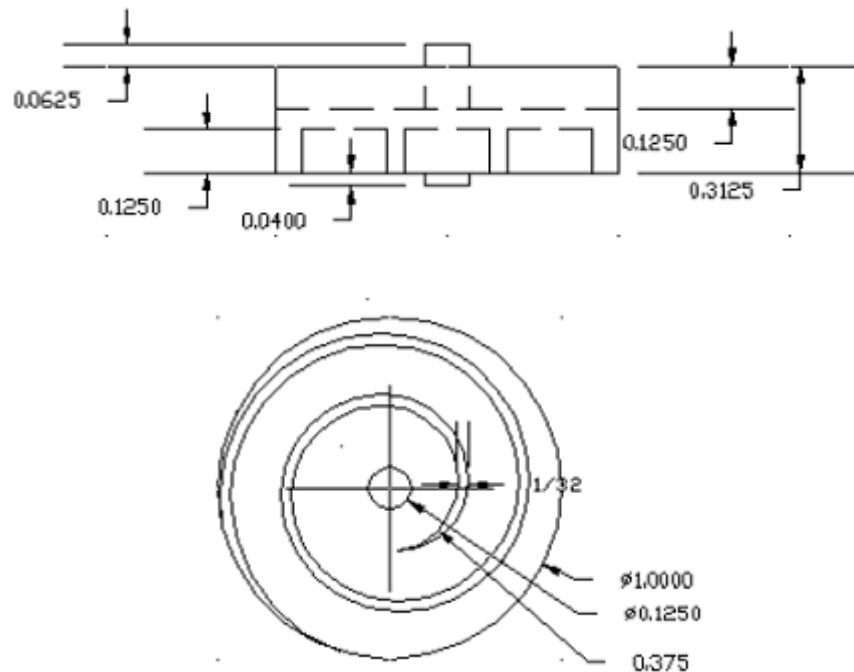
Geometrical drawing of the rotating spiral disk [3]
